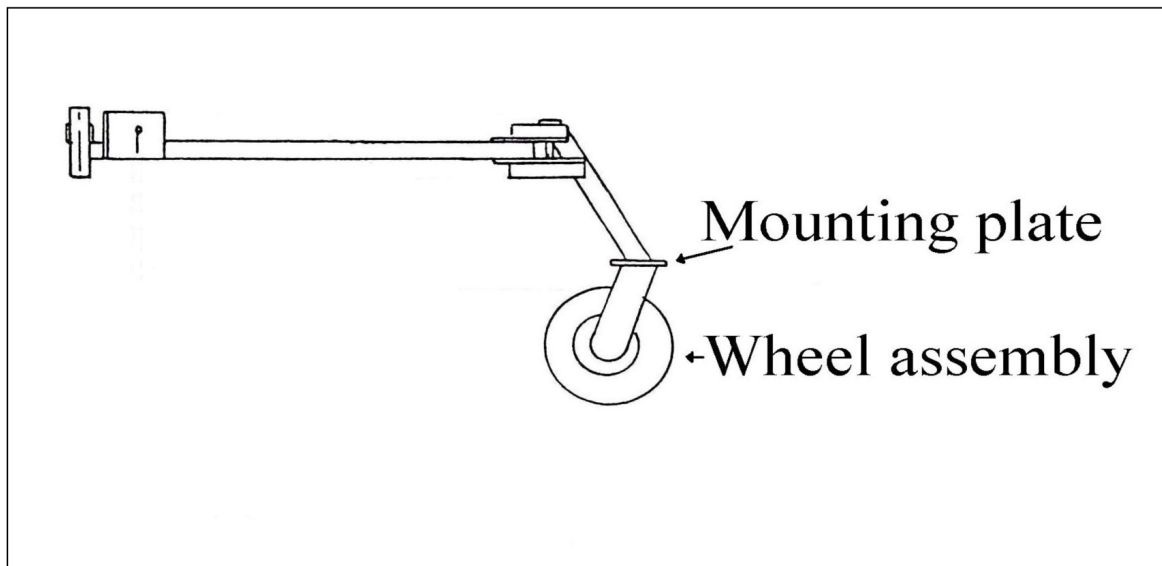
Schematic of wheel assembly attached to mounting plate, side view
